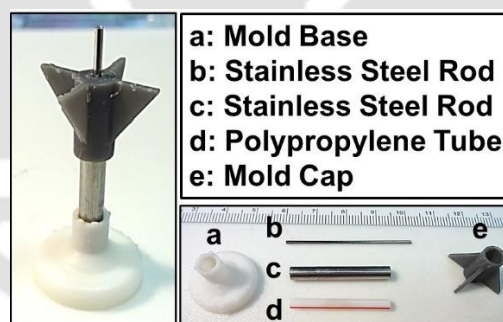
Custom made 3D printed mold used for fabrication of inner porous layer of tubular silk scaffold. Polypropylene tube was inserted in the stainless steel tube, which helps in easy removal of silk scaffold post lyophilization.
